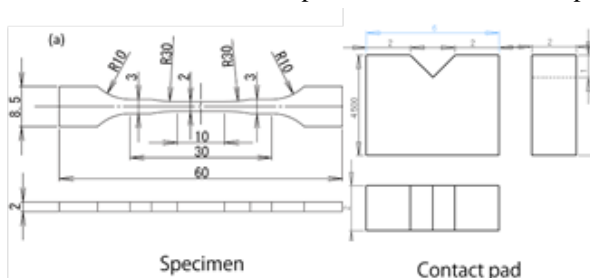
Geometry of fretting testing specimen. (a) Specimen (b) contact pad
